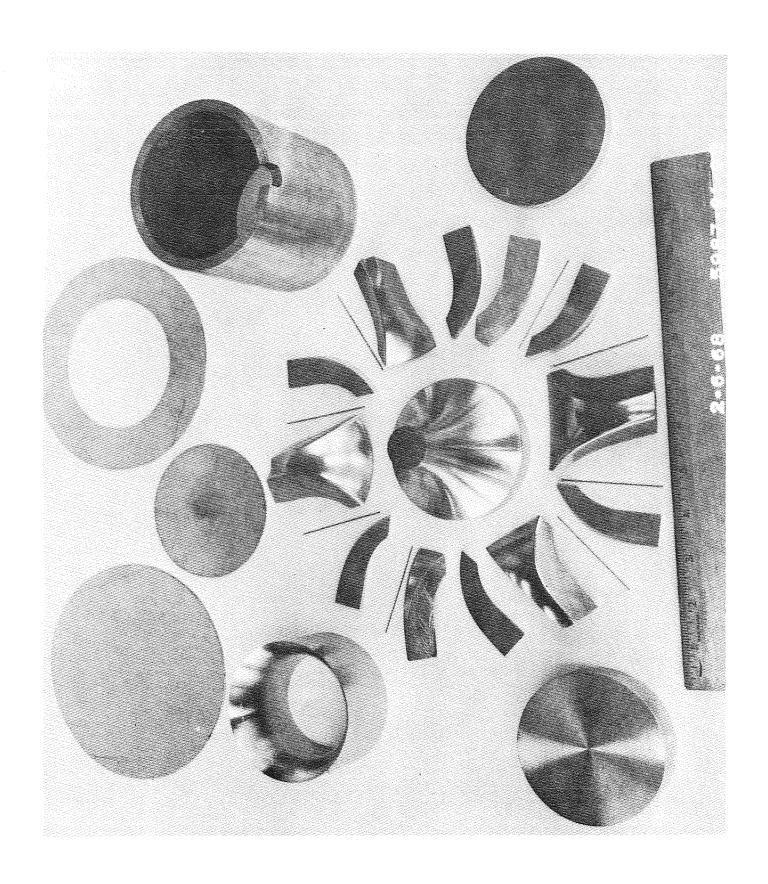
Final Simulated Impeller Sample Showing Complete Bond Assembly Before Lay Up
